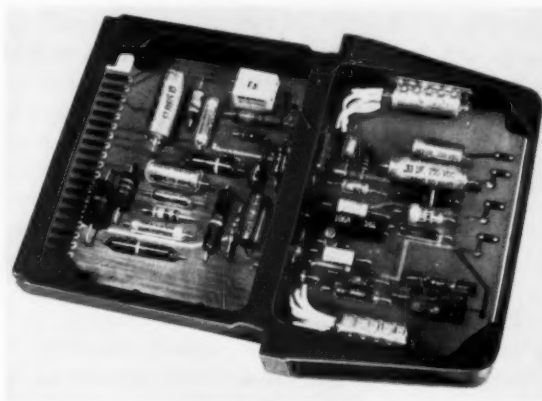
Printed circuit board used to interconnect the components of a single die-cast module unit.
